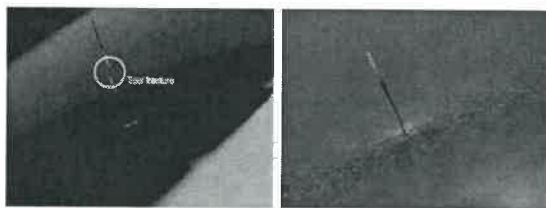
(a) fractured tool electrode at high voltage, and (b) welded part on the work material.
